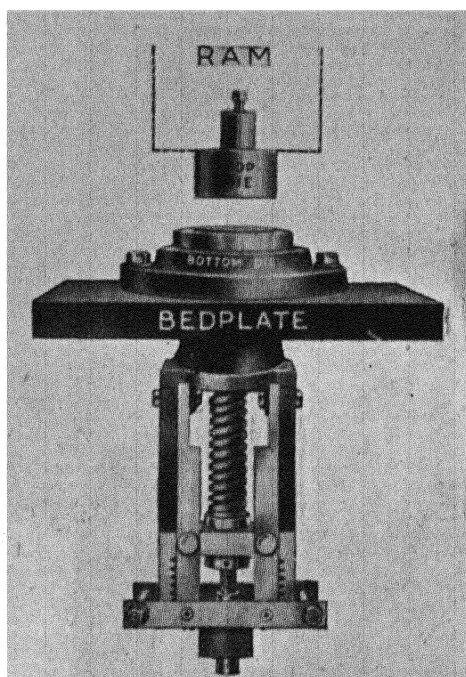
THE “SIMPLEX” DRAWING DEVICE, A SELF-CONTAINED PORTABLE UNIT WHICH ENABLES A SINGLE-ACTION PRESS TO DO THE WORK OF A DOUBLE-ACTION MACHINE
